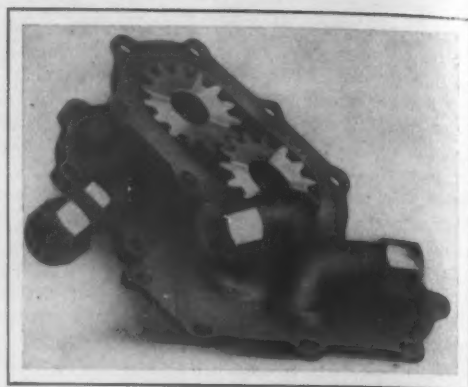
The Geared Pressure Pump Forming a Part of the Lubricating System
